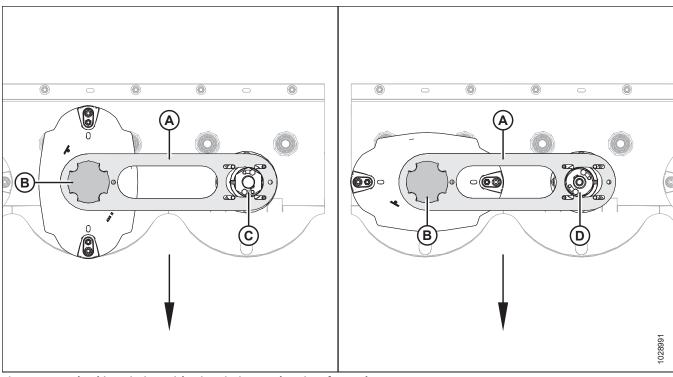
Checking Timing with Disc Timing Tool – View from Above
